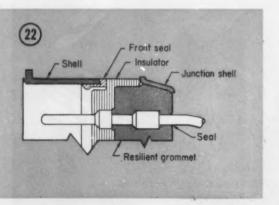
Moisture sealing technique on plugs using a resilient grommet.
